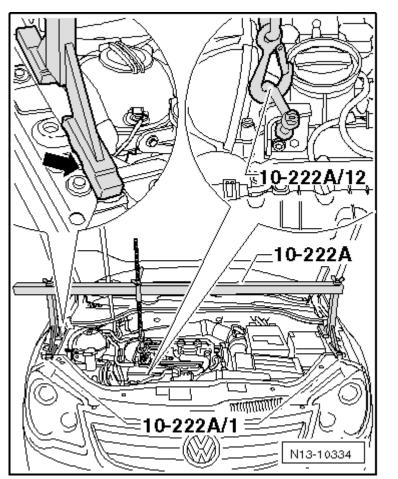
Identifying Engine Support Bridge -10-222 A- And Special Tools Courtesy of VOLKSWAGEN UNITED STATES, INC.
